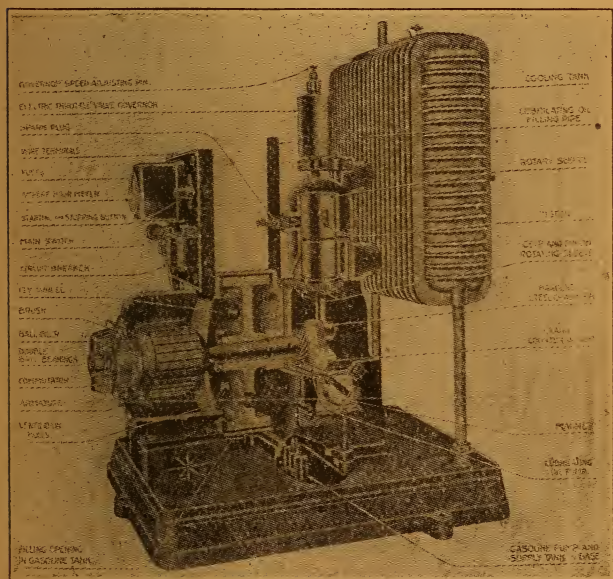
Alamo, rotating sleeve valve engine. This engine is water-cooled, but a tank with radiating fins is used in place of the radiator.
